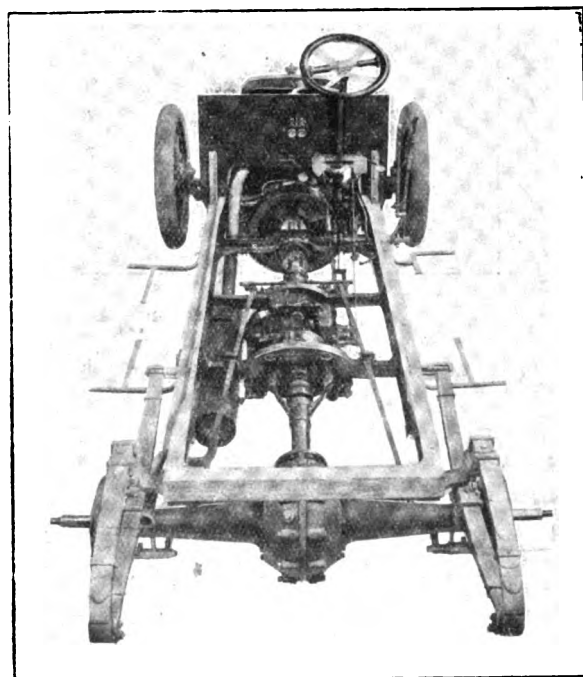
View of Chassis of the latest Live Axle Panhard Cars.
